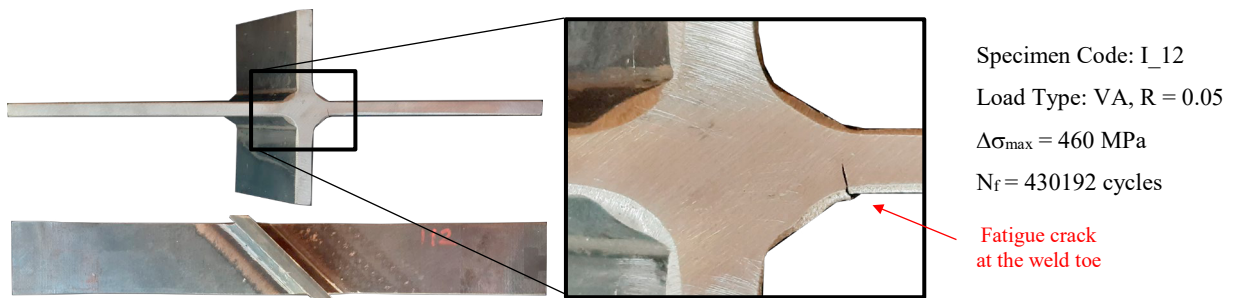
Fatigue crack initiation point: example of crack at failure observed in specimen I_12, tested under VA loading.
